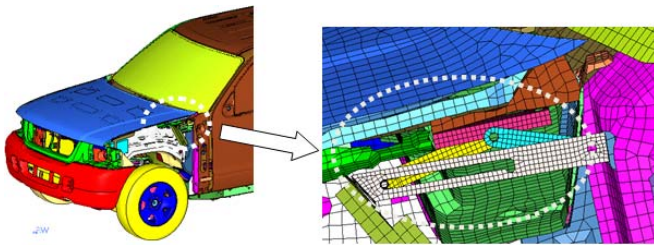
The assembly of the rear portion of lift mechanism on the car
